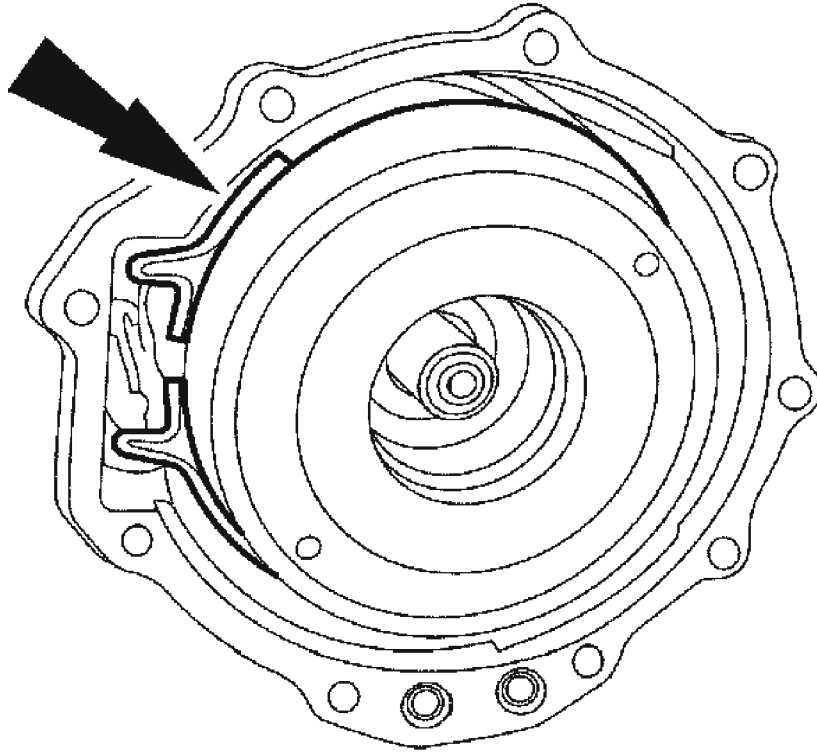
Installing Intermediate/Overdrive Drum Assembly
